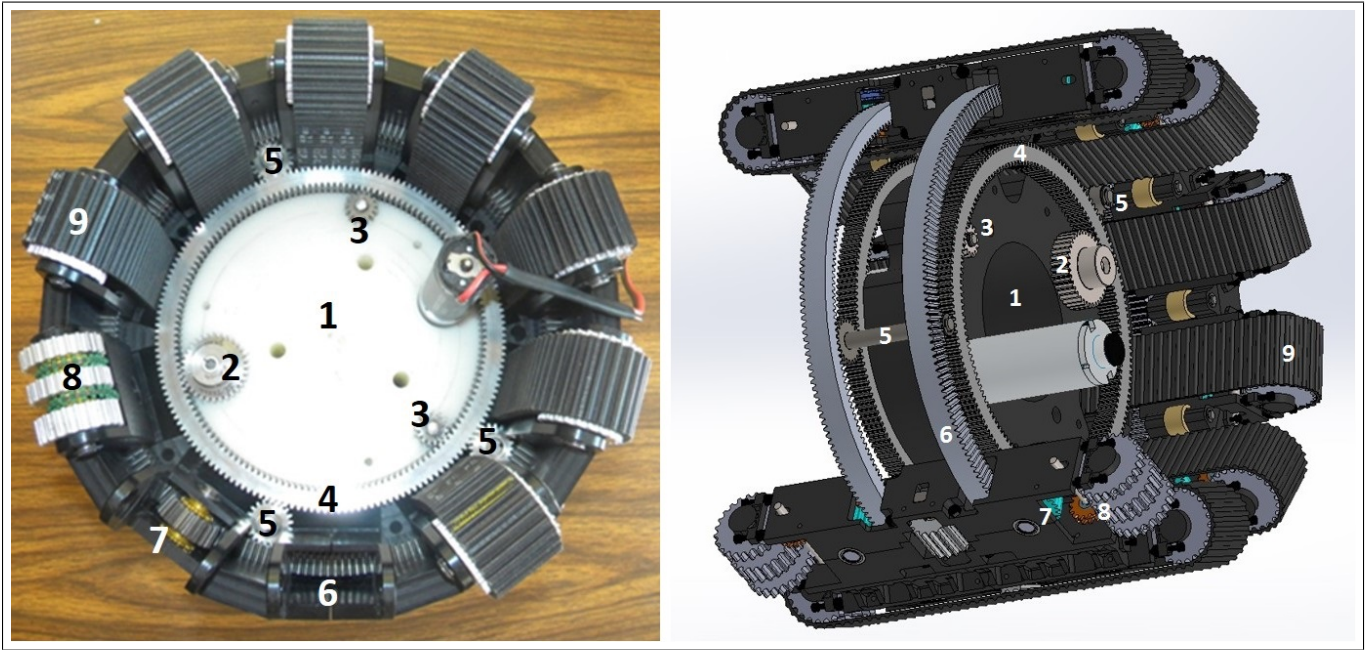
Closeup view of the 2-D tread module, highlighting the gear arrangement.
